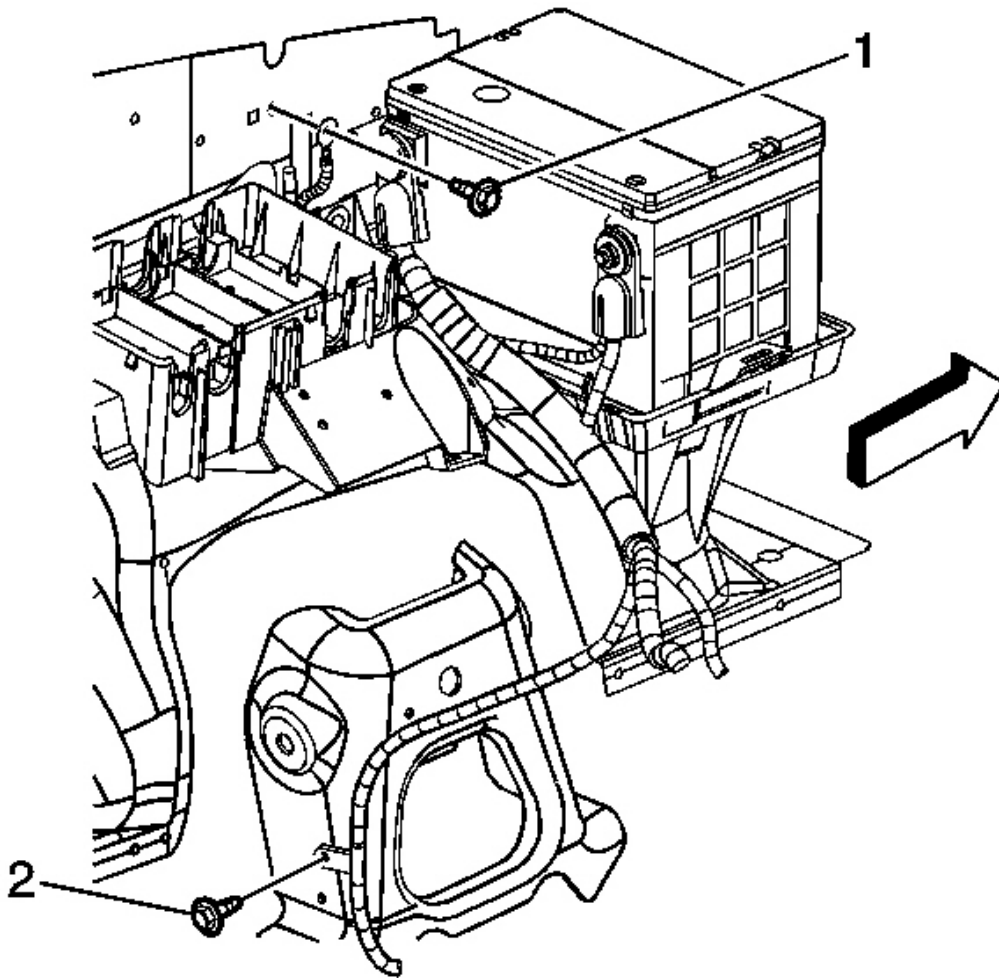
View Of Front Wheelhouse Panel Bolt & Shock Tower Bolt
